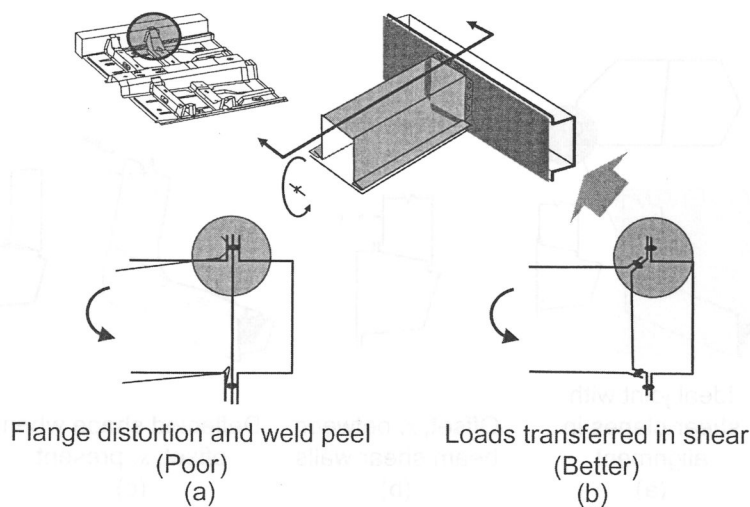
Seat-cross-member-to-rocker joint construction: Out-of-plane bending.
